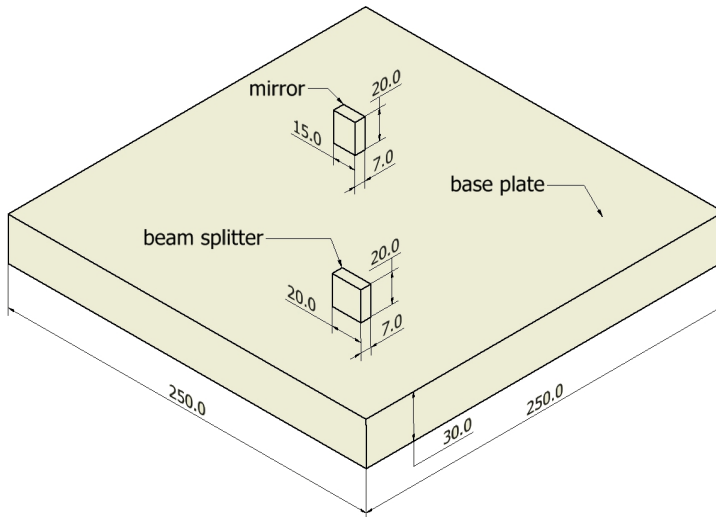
CAD drawing showing the dimensions of bonded components given in mm.
